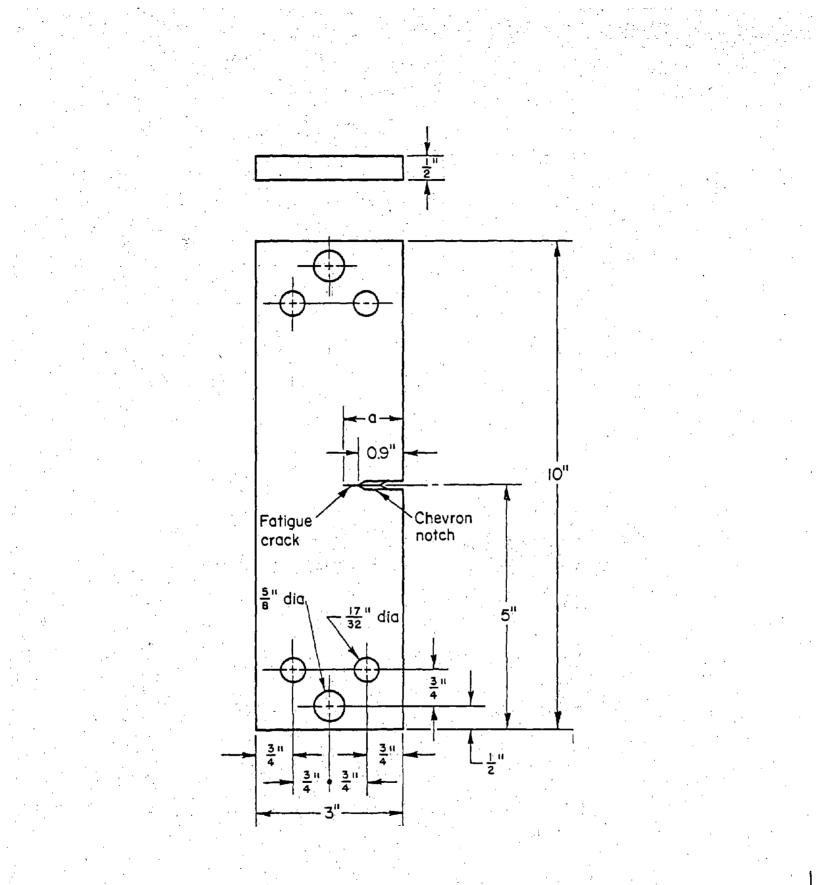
SINGLE-EDGE NOTCH CRACK GROWTH SPECIMEN
